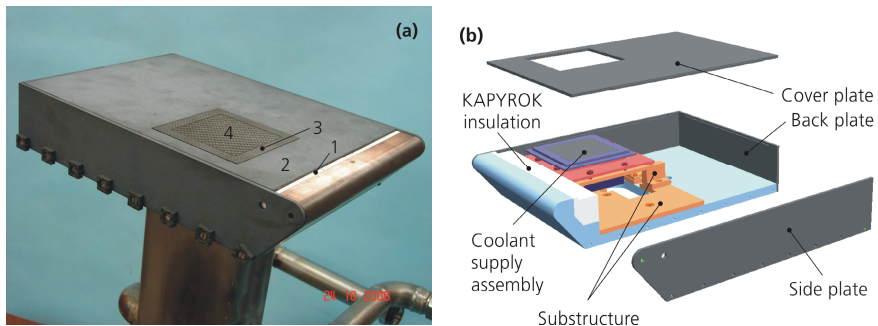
(a) Main test model and its (b) exploded view (without inner insulation), 1 = KAPYROK insulation, 2 = cover plate, 3 = cover frame, 4 = porous sample
